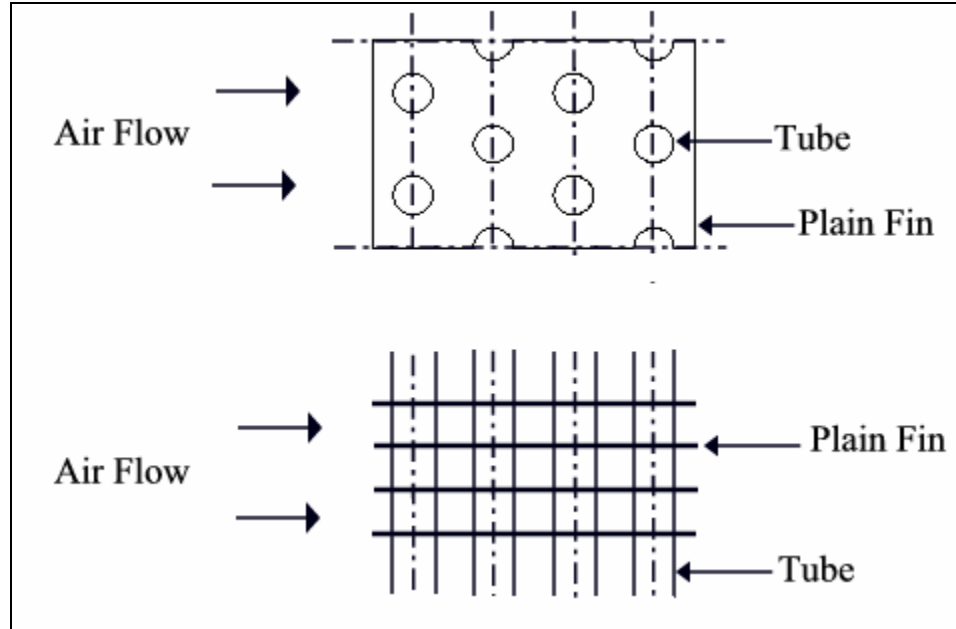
Plain plate fin-and-tube heat exchanger with staggered tube layout
